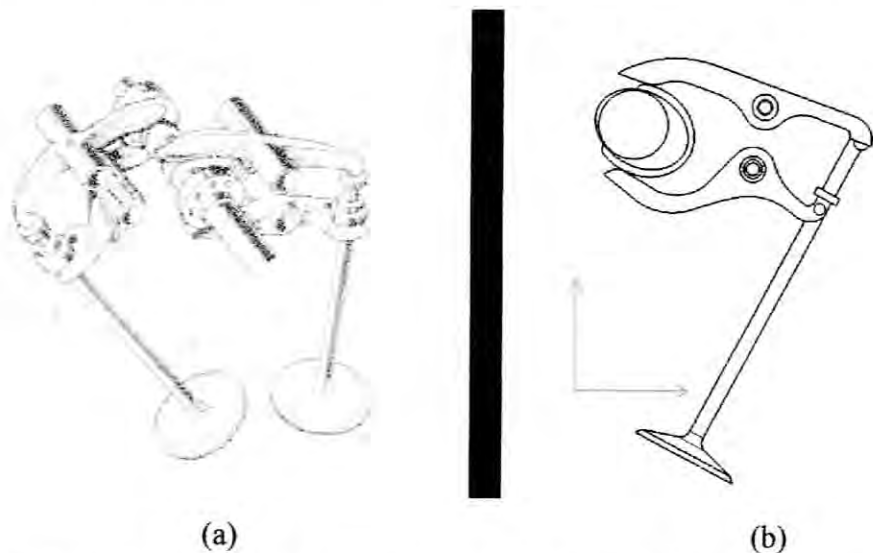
(a) General view of the desmodromic valve train of Ducati motorbike engines with 2 valves per cylinder with single camshaft operates open-close of the system. (b) Drawing by Catia.
